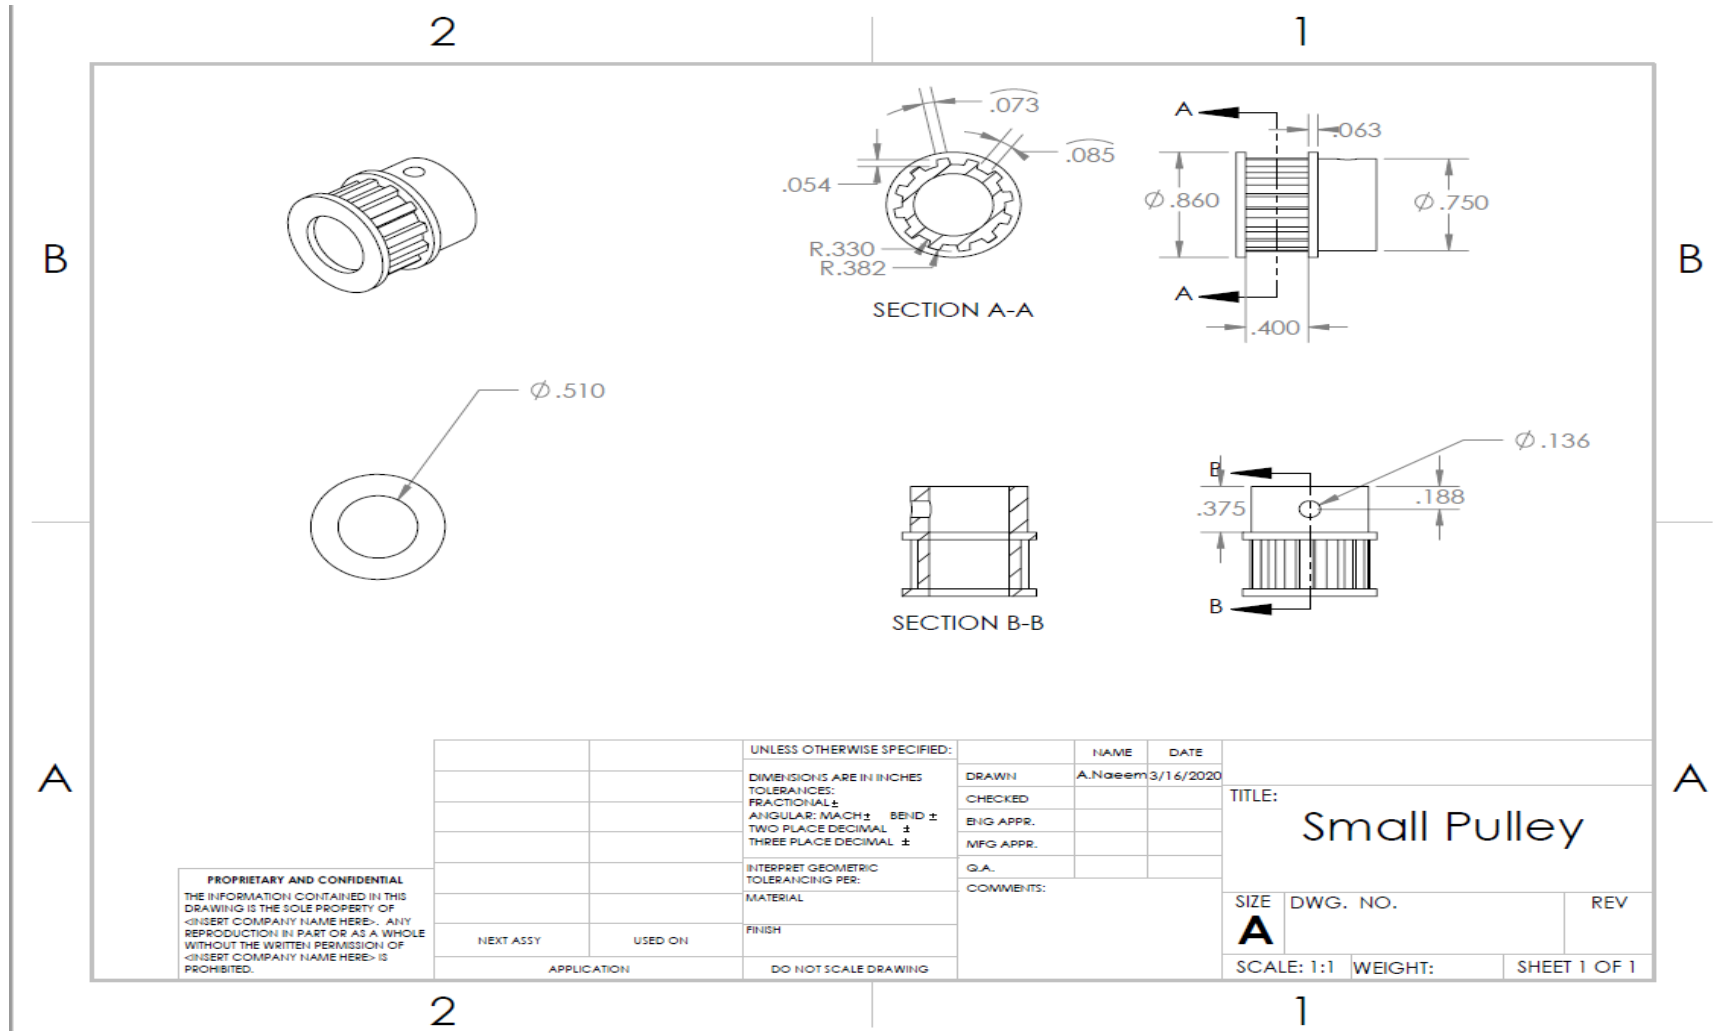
Engineering Drawing for the Small Pulley (Designed for 3D Printing)
